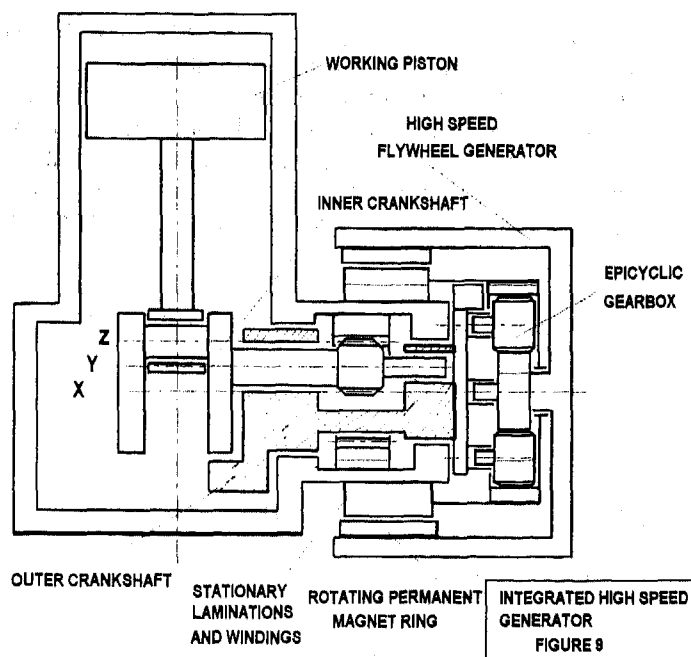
(schematic drawing) shows the principle of integrating a brushless generator with the engine. This drawing also shows a speed increasing gearbox, which is used to run the permanent magnets at higher speeds to generate the required current with a relatively small rotor.
